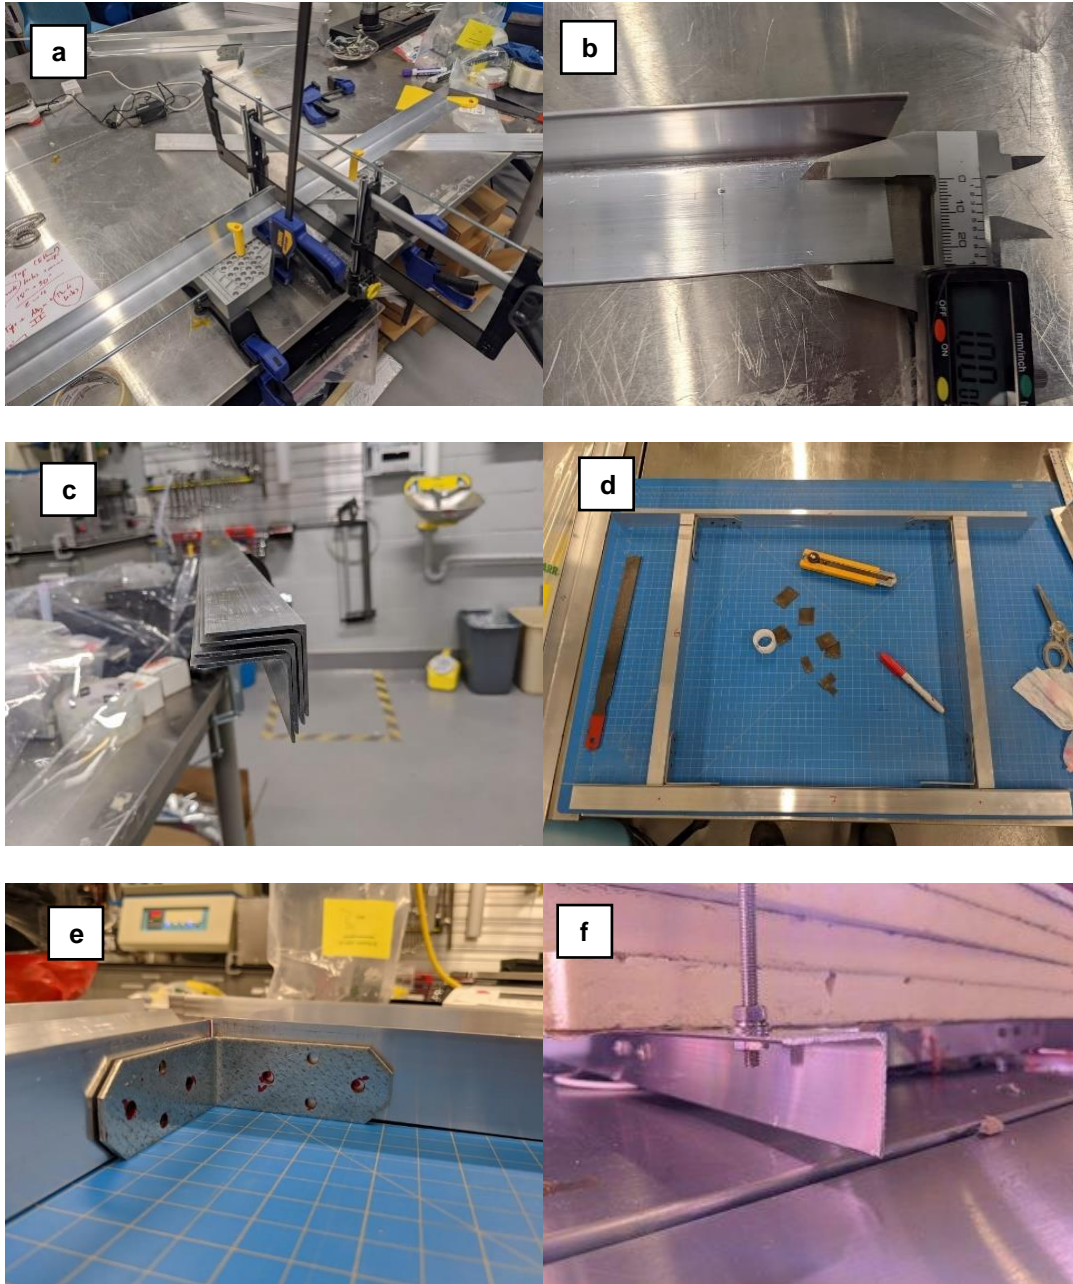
Steps in the preparation of clasper: (a) cutting aluminum angle with Mitre box; (b) punching tapholes for drilling onto claspers; (c) ends of clasper filed; (d) clasper taped to cutting mate and 90 degree angles aligned and (e) holes marked with red pen. (f) Close-up of holes marked using the 90 degree angle as template are shown with jam nut arrangement at the four corners of bottom clasper.
